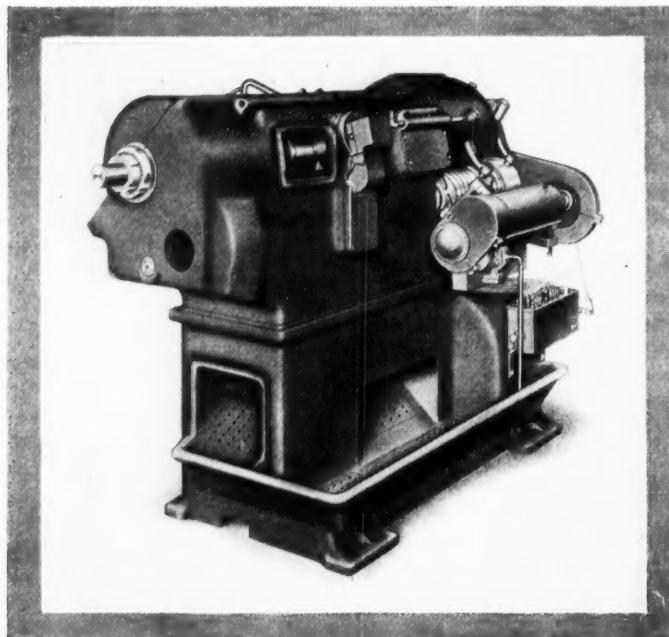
Rear view, showing single camshaft, feed works assembly and pressure lubricator which is below all bearings
